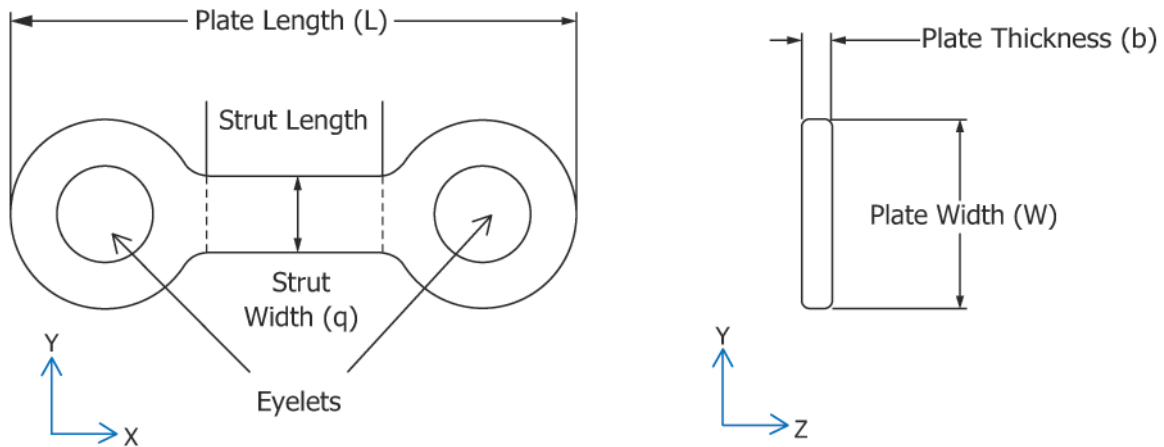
Basic Two-Hole Small Bone Plate and Dimensions
